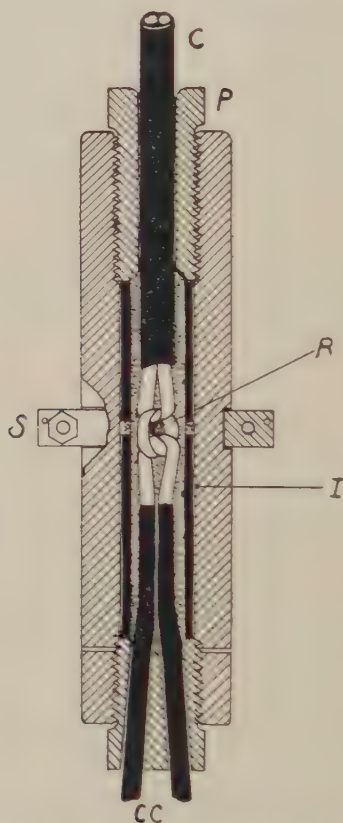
A, insulator to keep water from entering the covering of the outer cable. C, cable; P, plug screwed in after the assembly was completed; S, supports for wires carrying the basket containing the cell; R, short rod for holding the knot in the center of the space; I, iron pipe supports for the rod (R); CC, separated wires covered with gum tubing.
